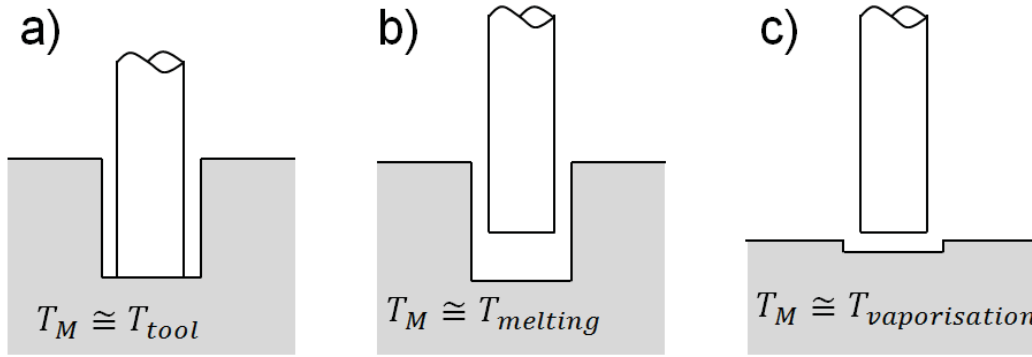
Schematic of the machining mechanism which is a combination of thermal assisted etching (breaking the Si-O-Si bonds) and physical bombardment of the surface by discharge channels.
